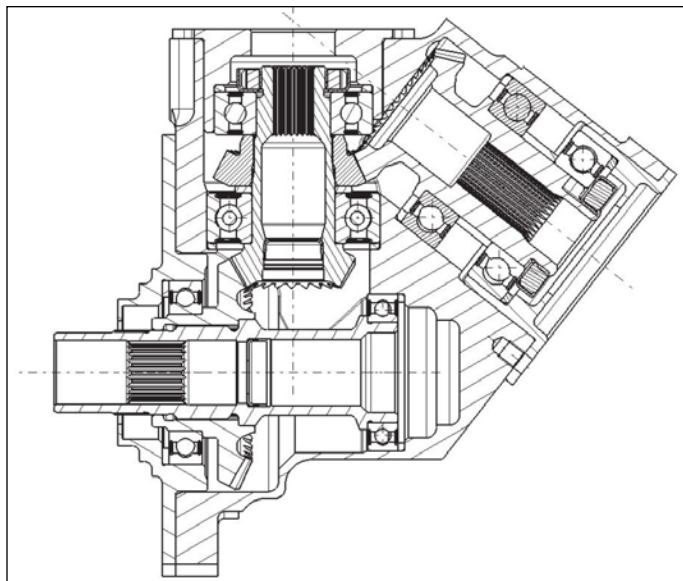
Example gearbox incorporating bevel gears at right angles and bevel gears at an acute angle; this method can also be used for bevel gears at an obtuse angle.
